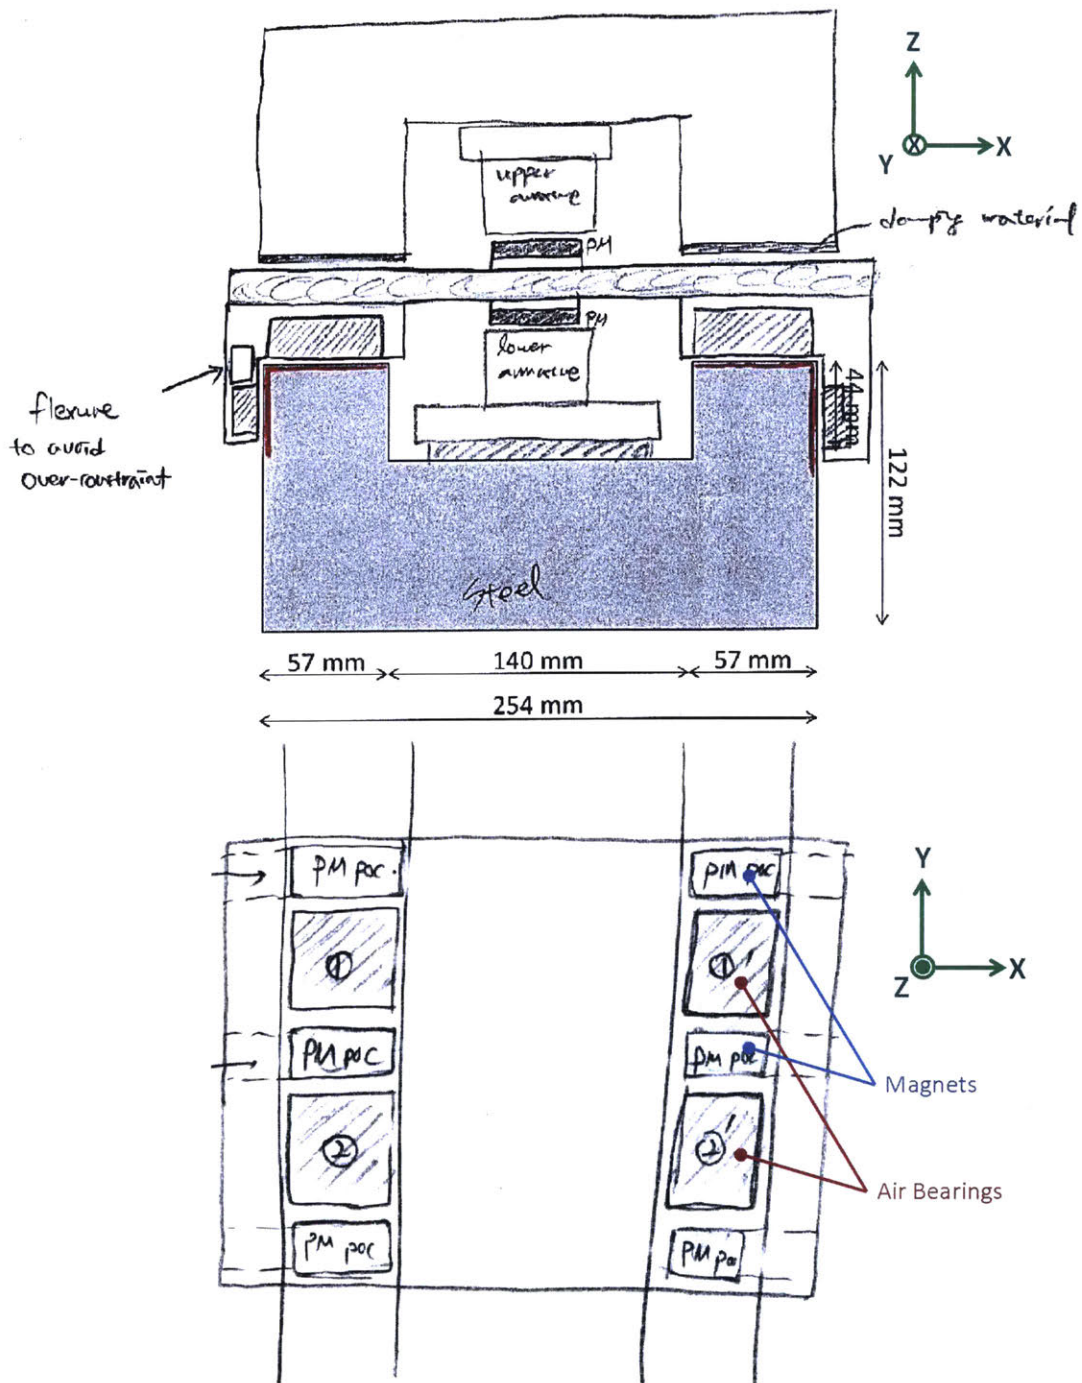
Hand sketch of another possible design with air bearings preloaded by magnets. Front view (upper) and top view (lower).
